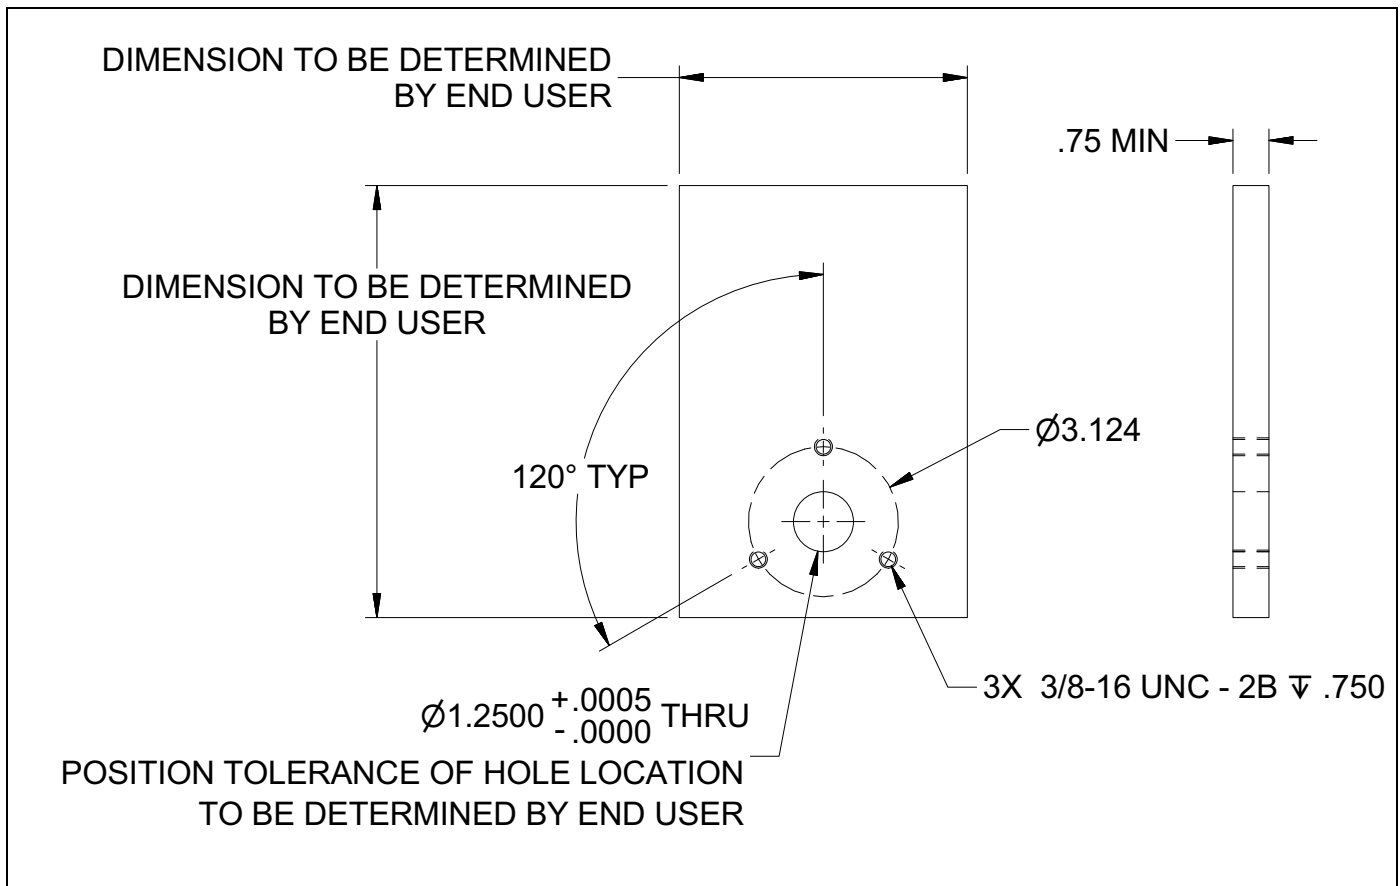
HOLE PATTERN CALCULATIONS FOR MOUNTING
